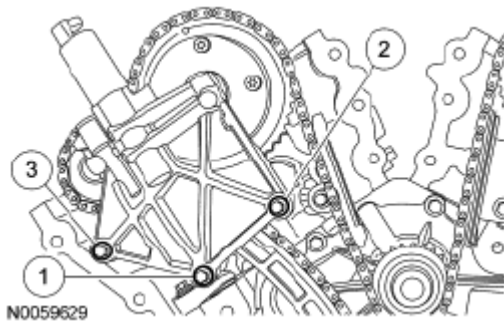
VCT Housing Bolts Tightening Sequence - RH
